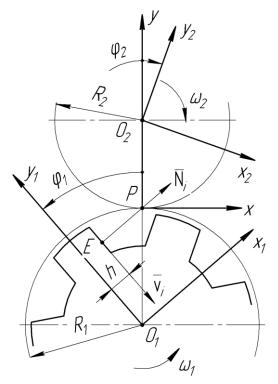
Chart of determination profile tooth of gear shaper cutter for cutting of spline shaft tooth
